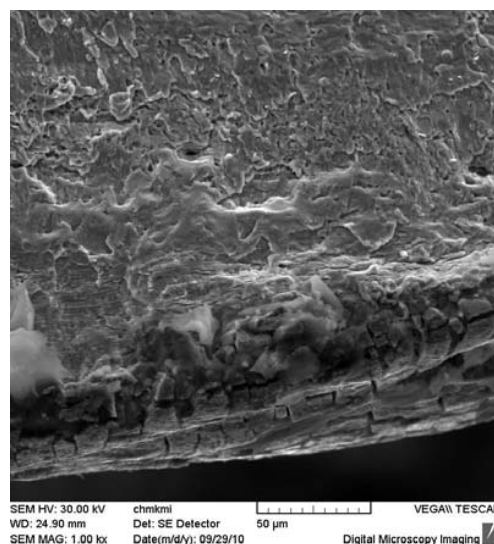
Cracked oxidic layer of nitrooxidised sheet surface at final fracture zone
